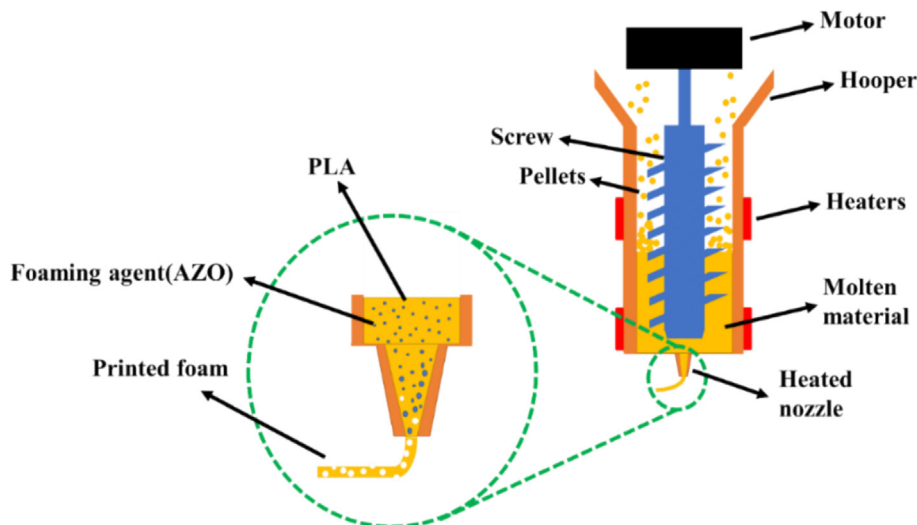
Direct pellet printer mechanism and foam 3D printing process.
